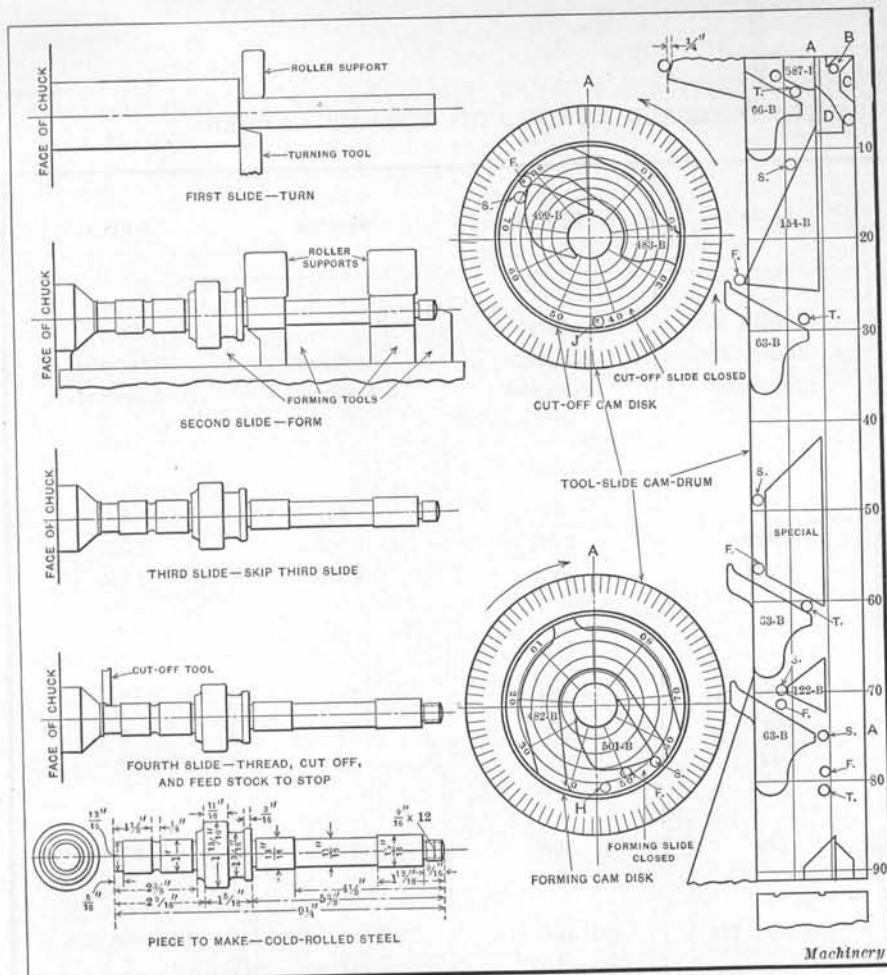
Tooling Lay-out for a Long Shaft largely completed by Forming
